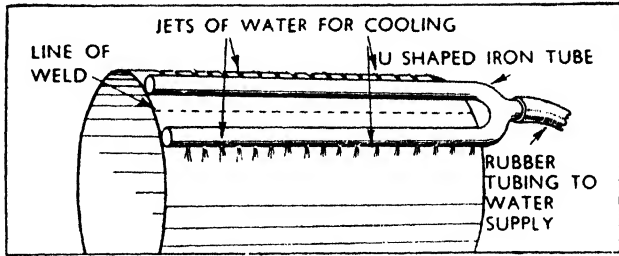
ANOTHER METHOD FOR PREVENTING DISTORTION WHEN WELDING SEAM ON TANK OR DRUM
